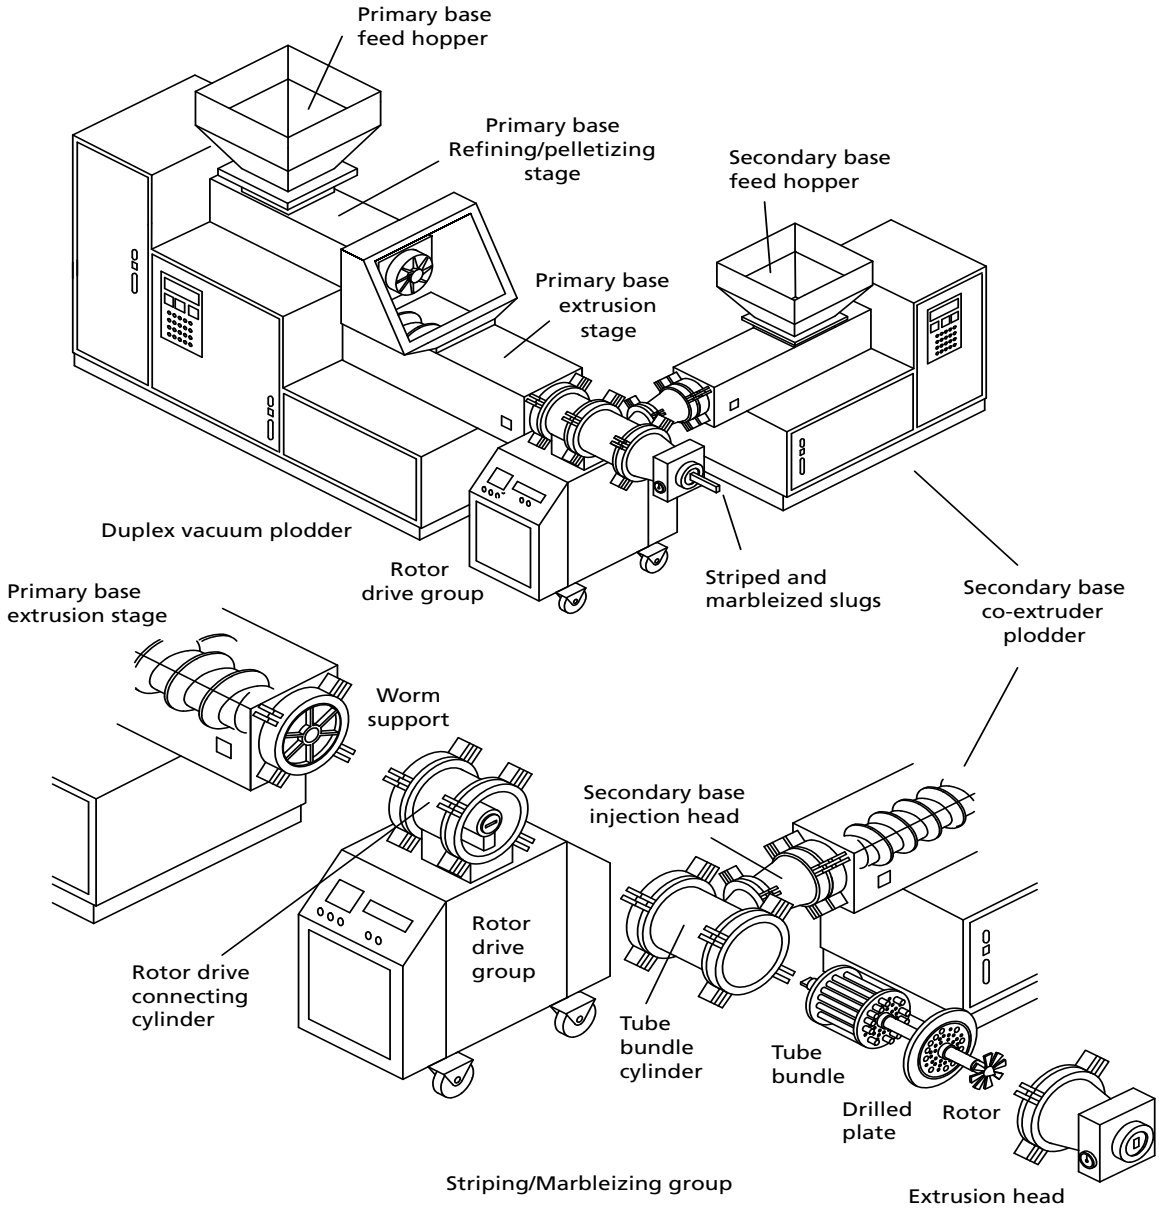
Solid–solid co-extrusion system with rotor drive group for striped and marbled soaps.
